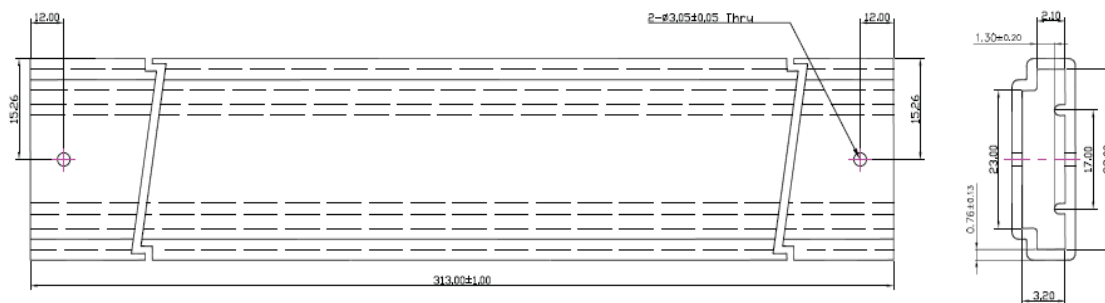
Tube dimensions for L2C5-xxxx1211x190x, L2C5-xxxx1216x230x, L2C5-xxxx1812x230x and L2C5-xxxx1816x230x.
